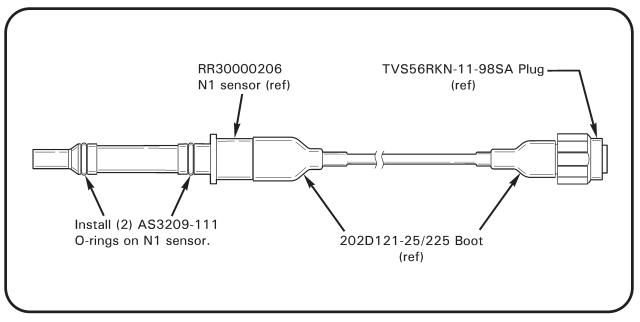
F049-019 N1 sensor electrical harness assembly (O-ring installation)
